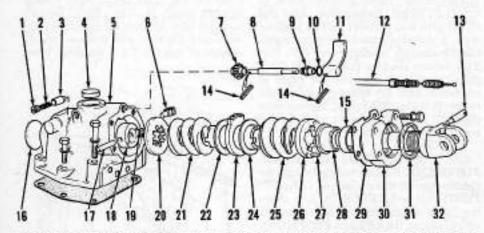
Exploded view of selective rate sensing unit showing component parts and their relative positions.
